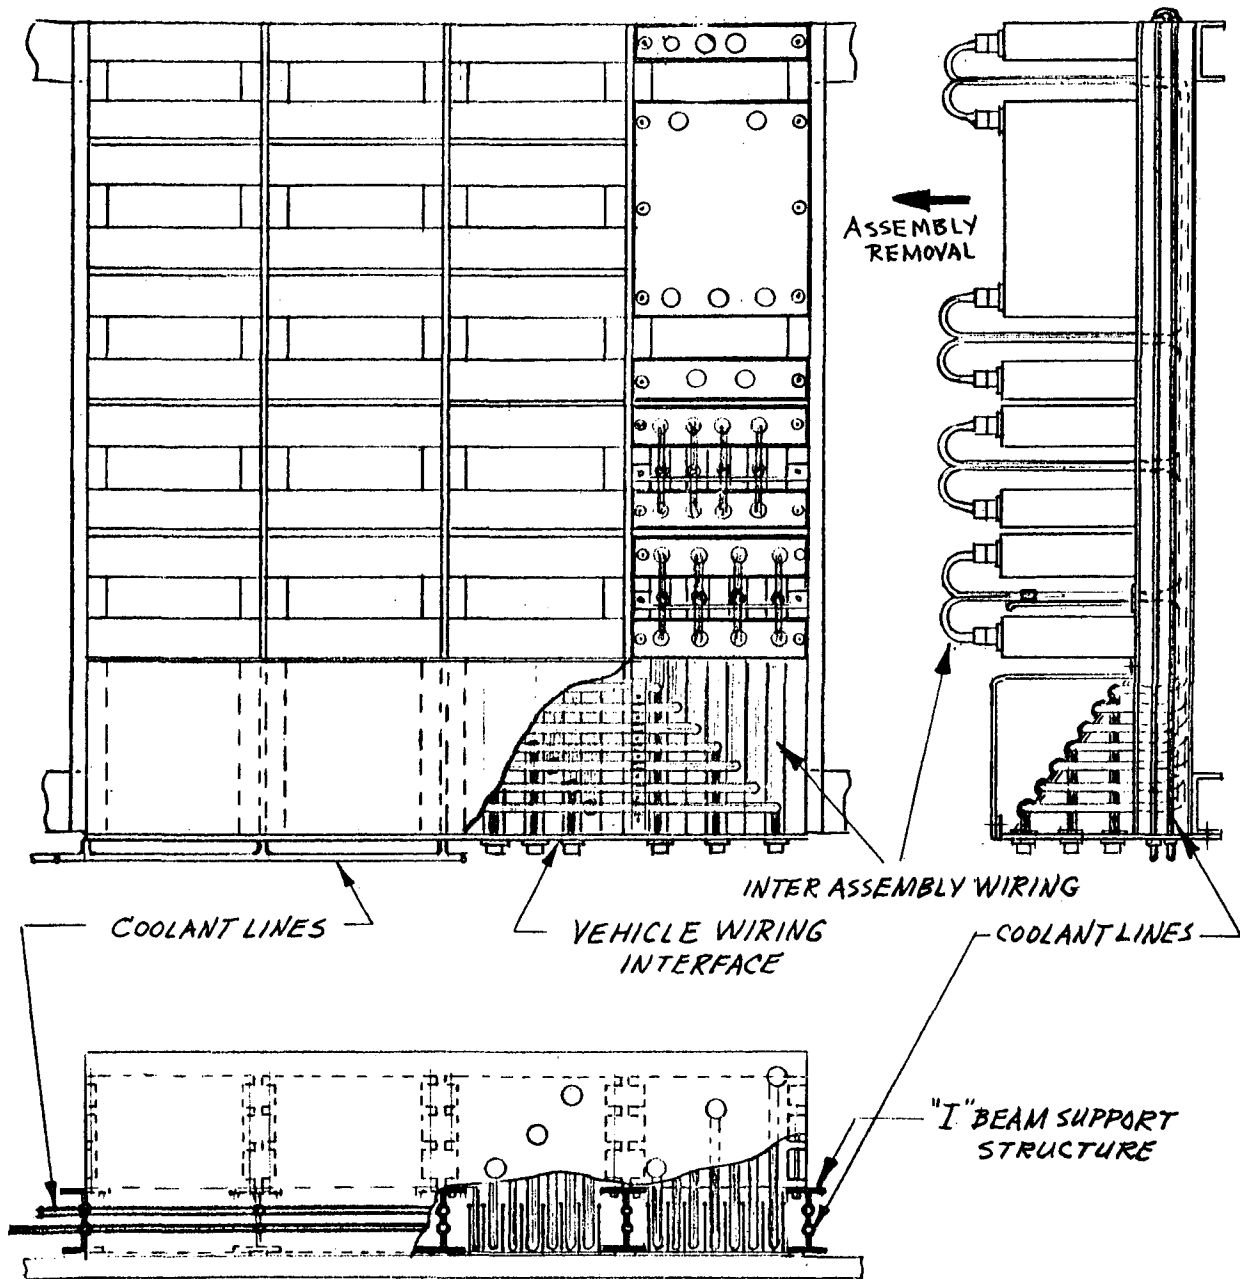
Installation Section—Wiring and Cooling Configuration
